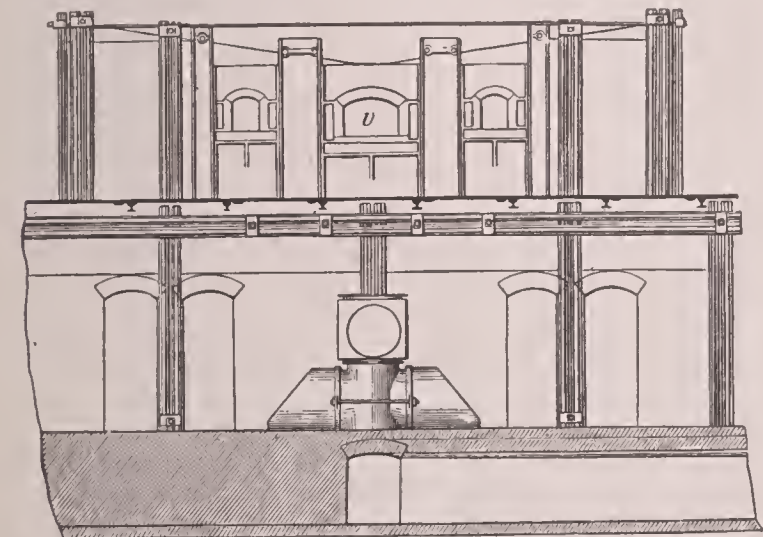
Siemens gas-furnace (exterior view of the charging side, and of the regenerator below).
